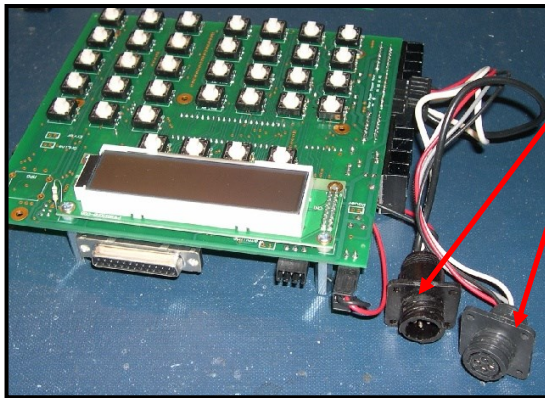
Socket and plug style connectors for supplying and accepting power.
